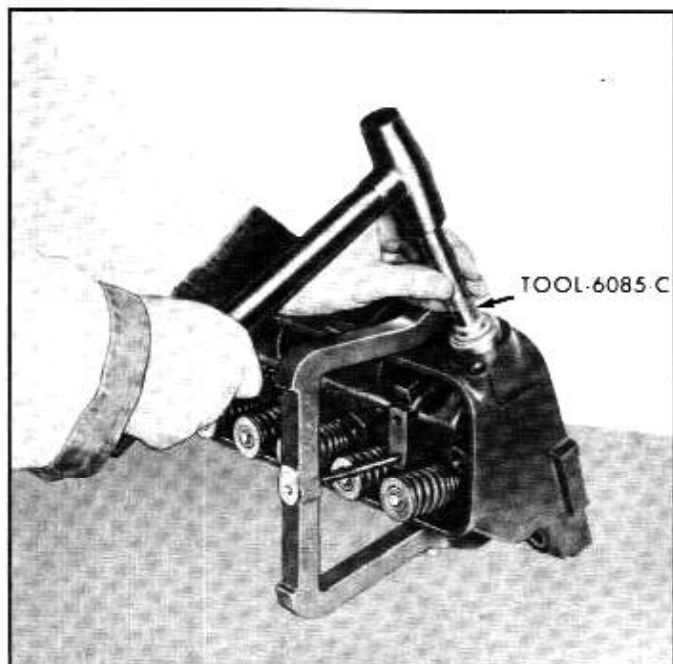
C-111—Installing Cylinder Head Water Jacket Plug
